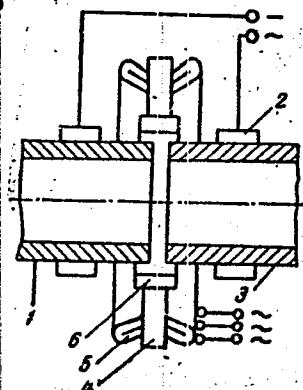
Schematic of the device for welding of pipes by a rotating arc, displaced by a traveling magnetic field. 1 and 3 - pipe; 2 - welding-jolt-ramming mechanism; 4 - core; 5 - inductor windings; 6 - ring of heat-resistant material for protection of inductor.
